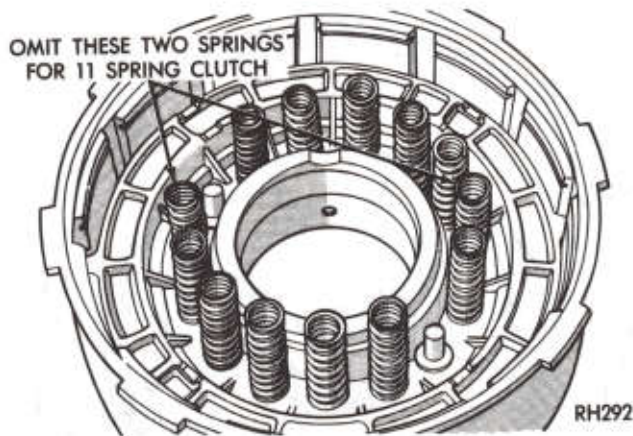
Front Clutch Spring Location (11 and 13 Springs)
